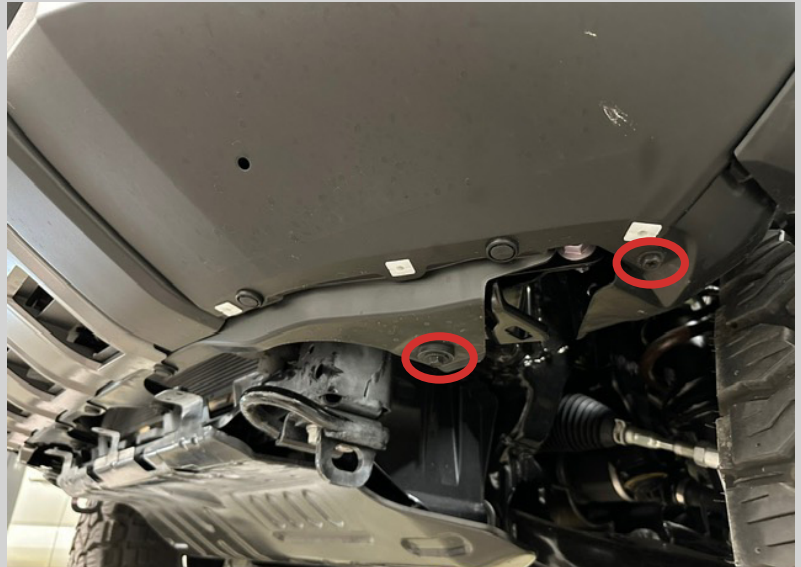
Bolt (center of the photo) and Screw (right) to remove.
